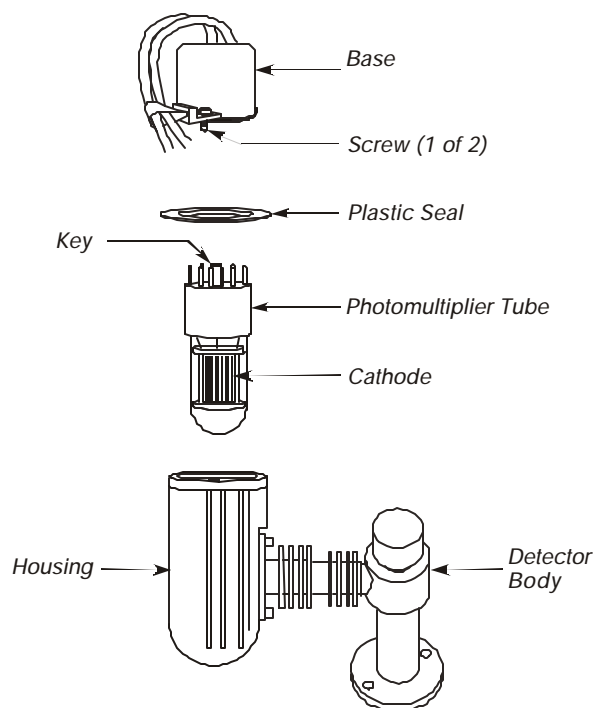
43 Exploded view of a FPD photomultiplier tube
